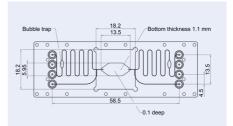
Detailed schematic drawing of basic sensor platform I - Fluidic 864
